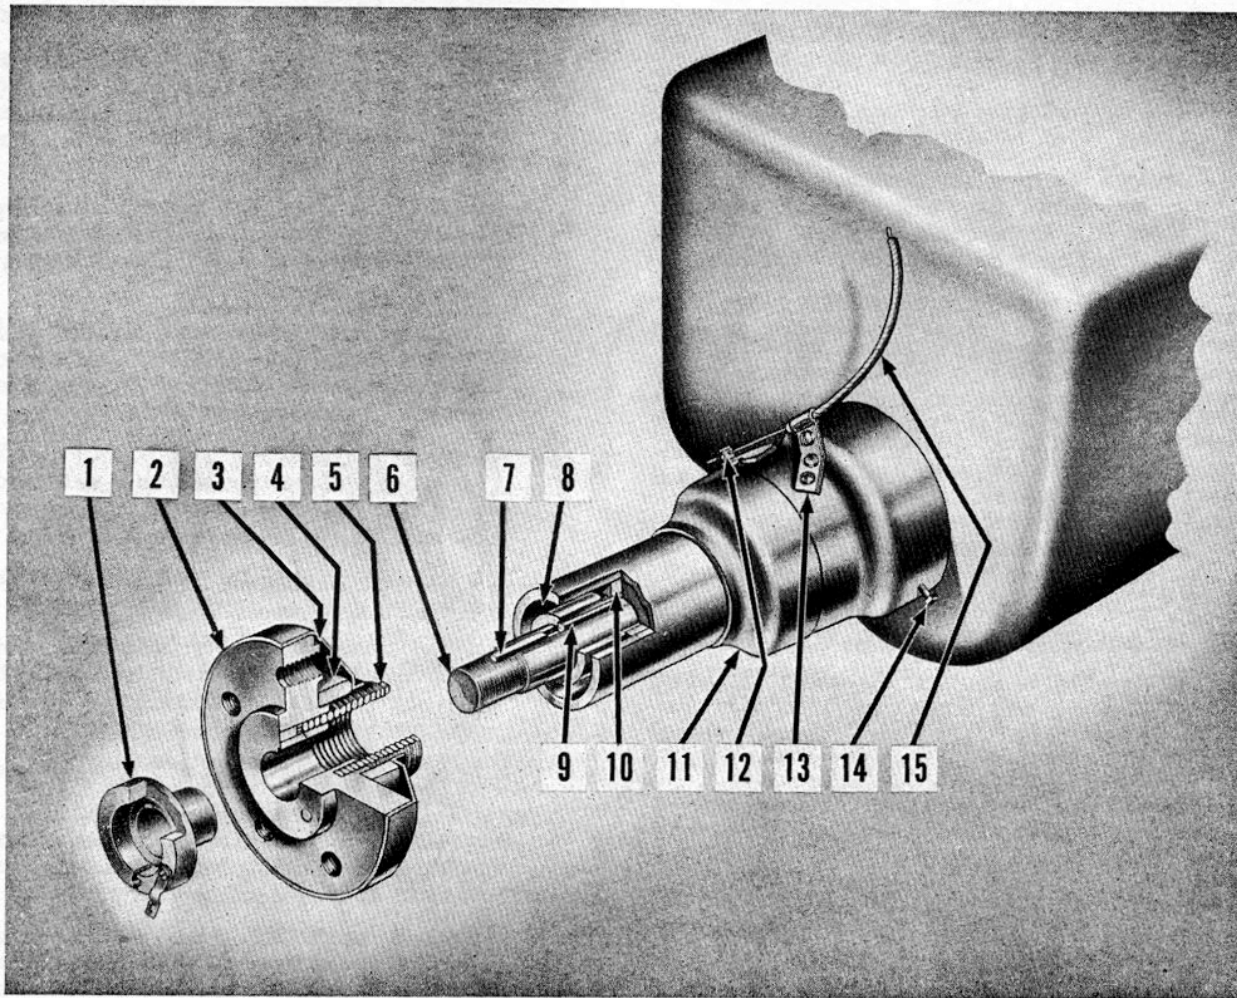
SECTIONAL VIEW OF HUB CLUTCH AND LOCKOUT ASSEMBLY
